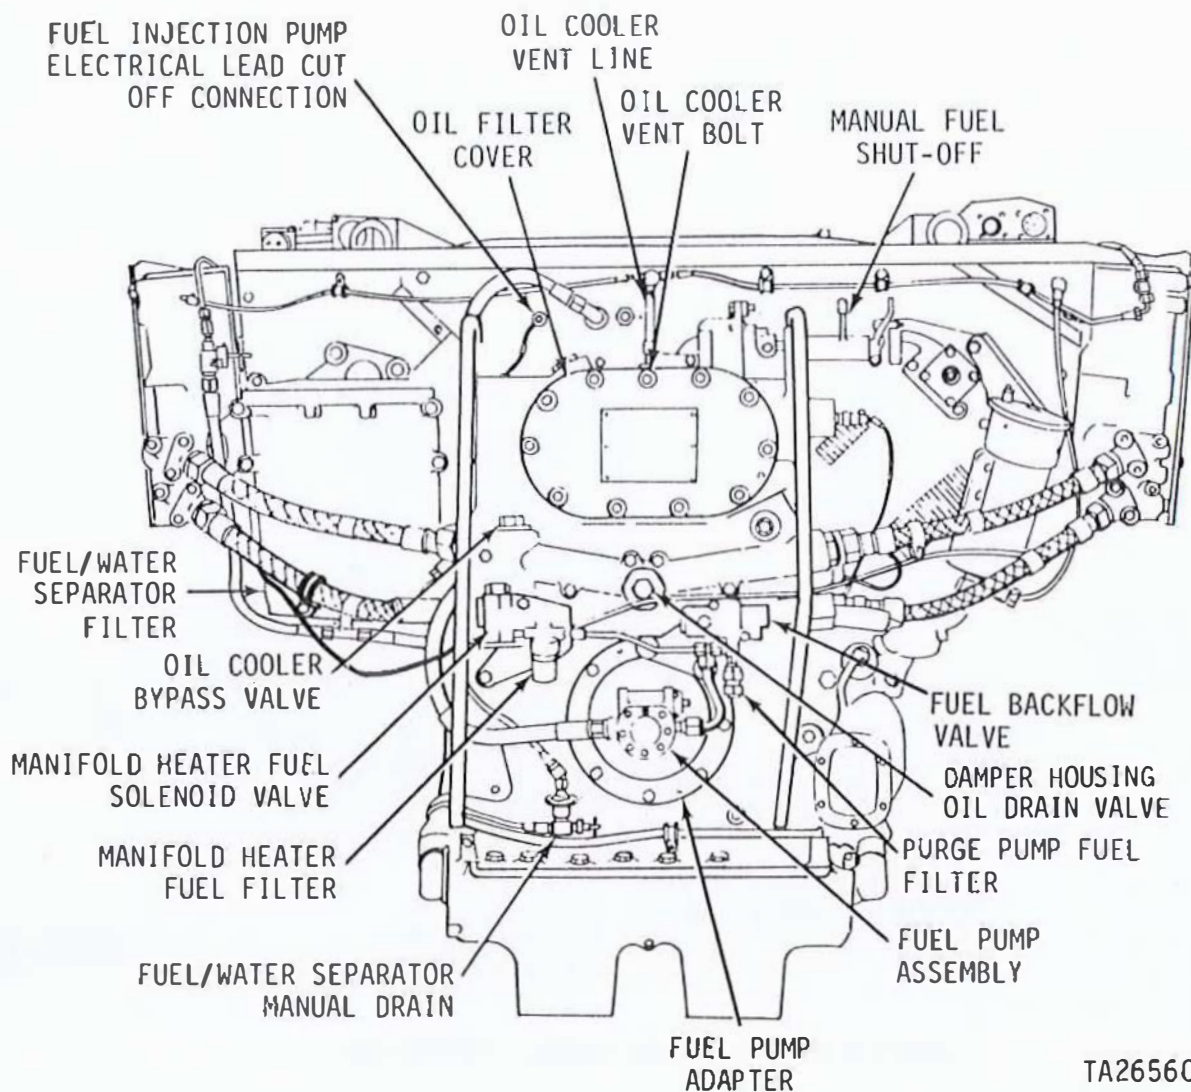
AVDS-1790-2D engine assembly — left front view.
